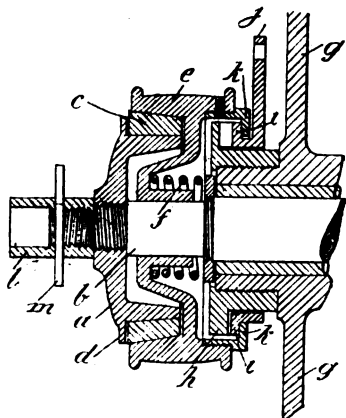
Section of Clutch on the Iris Motor Bicycle.
